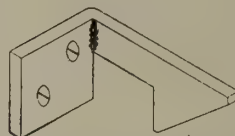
Perspective of Metal Catch for Back of Drawer Shown One-Half Full Size
